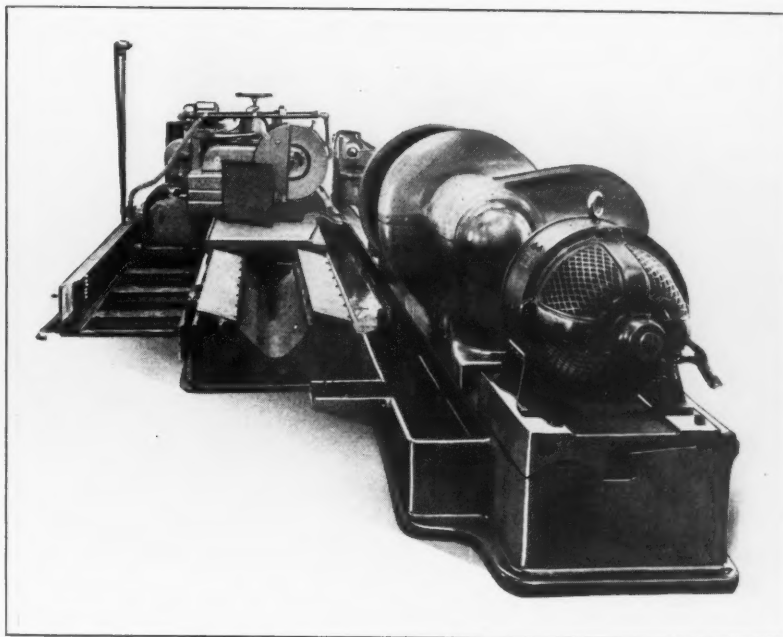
View of the Roll Grinding Machine from the Work-head End
